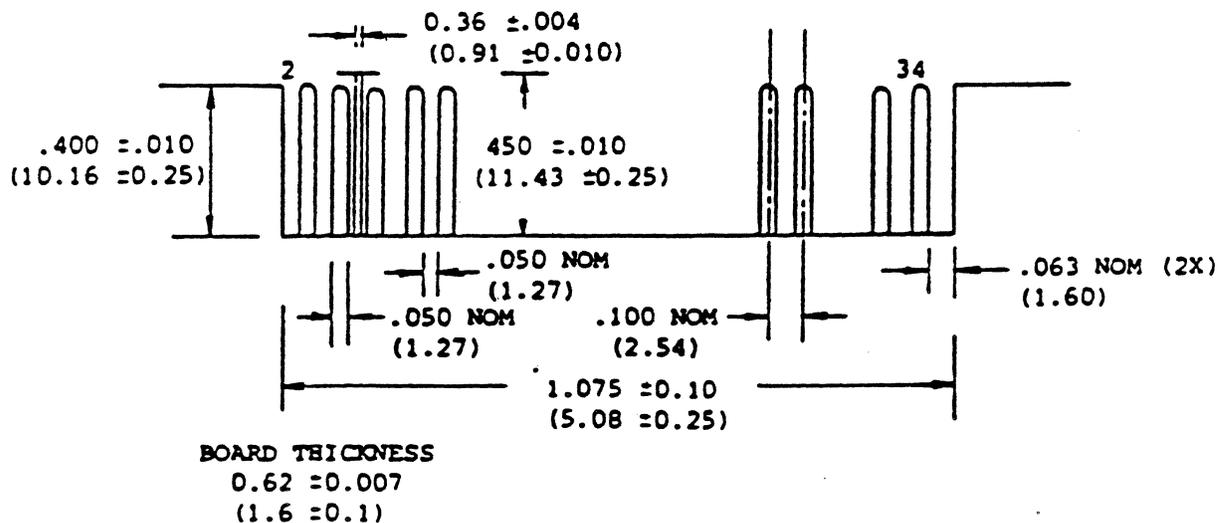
Connector J1 Dimensions (mm) and Pin Numbers
